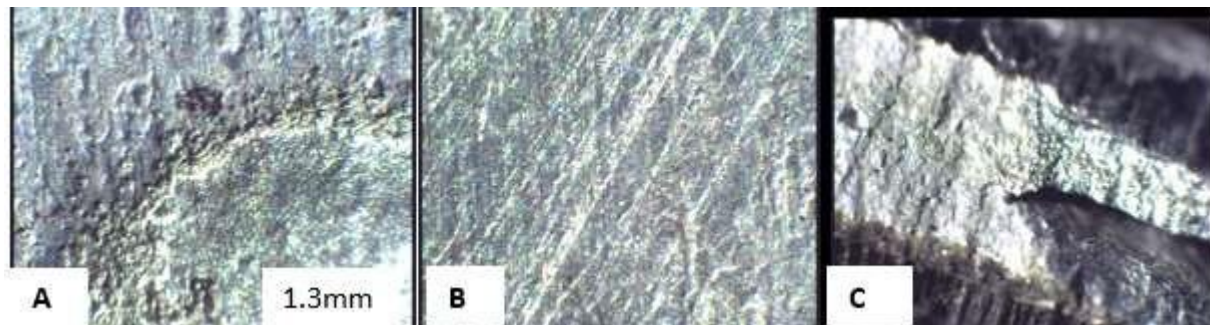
Cross section of the 1.3mm-thick aluminum-clad mild sheet: the thickness of the aluminum layer is 1mm and the thickness of the steel layer is 0.8 mm.
